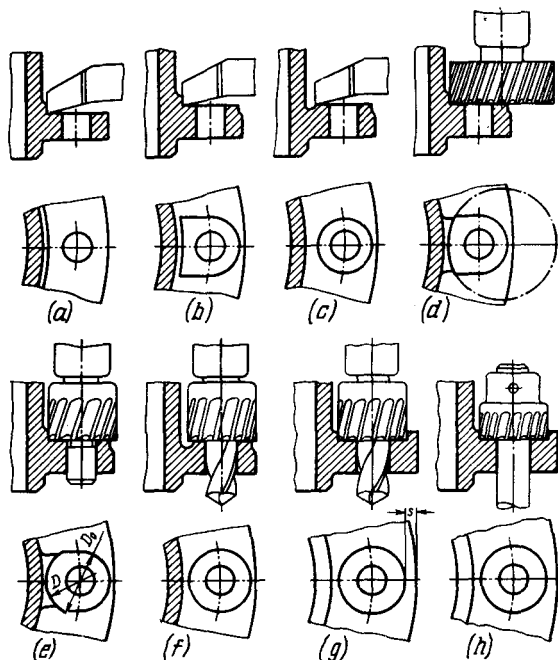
Machining methods for nut and bolt head bearing surfaces
